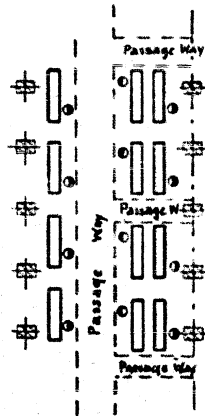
Placement of Machine Tools in Aisle in Three Rows with One Longitudinal Passageway
